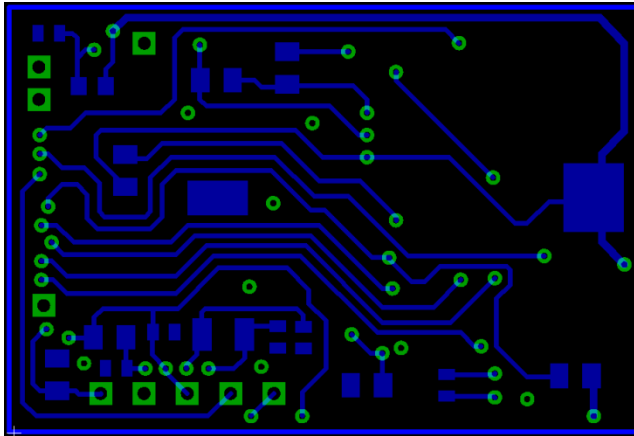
PCB – Bottom Layer plus Vias and Pads
